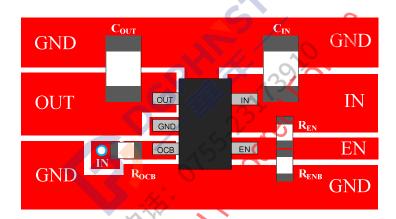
SY6861A1/A2 PCB Layout Suggestion
